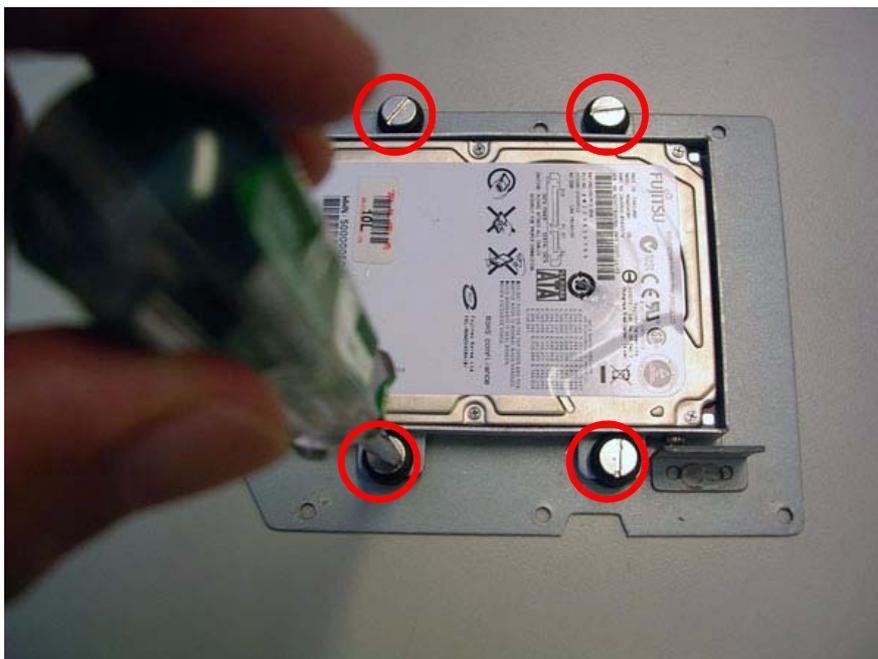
Screw on the HDD damper screws to assemble the HDD door and HDD frame
